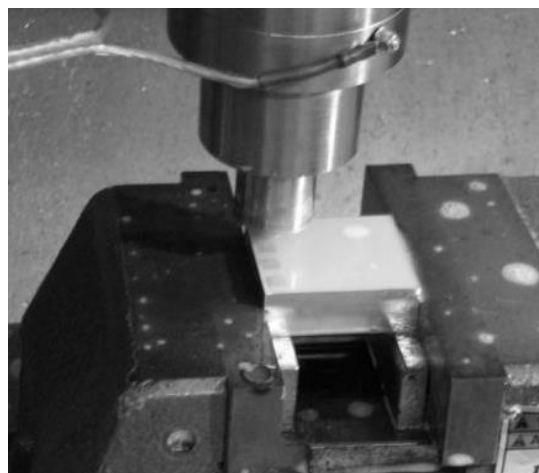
Prototype of the ball-burnishing vibration-assisted tool.
